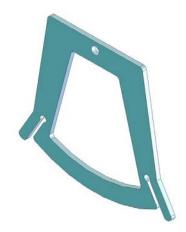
Sector transmission made from polycarbonate that increases gear ratio. Flexures provide preloading. Part drawing is generated in CAD and part machined in the water jet cutter.
